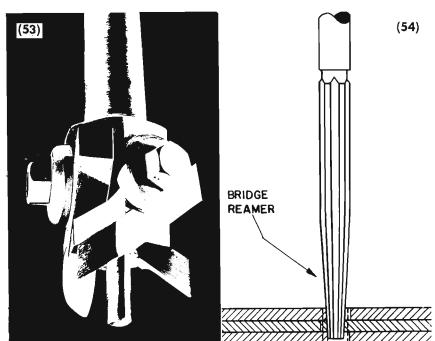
Tool for cutting 1-9/16-inch and 2-1/16-inch-diameter holes in steel.
